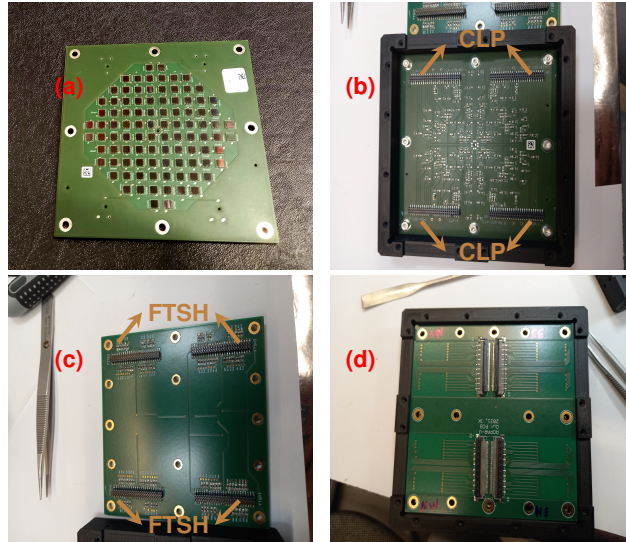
Different development stages of various PCBs carried out at GSI (a) SiPM matrix front panel, (b) SiPM matrix back panel, (c) PCB front panel containing male FTSH connectors that are inserted into CLP connectors on the SiPM PCB back side, (d) FTSH connector PCB back panel having X-connectors for flat cable connection.
